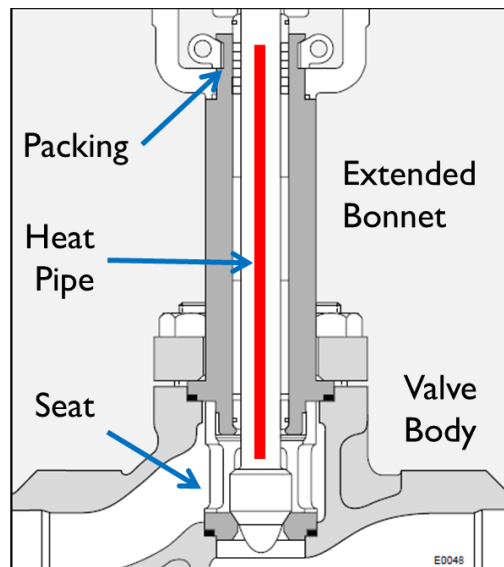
A diagram of a valve stem heat pipe integrated into a standard valve body with an extended bonnet
